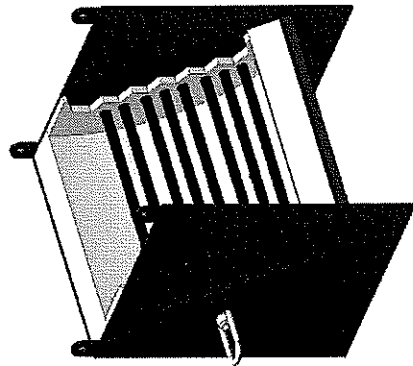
RENDER OF THE MOLD SHOWING THE INSTALLATION OF THE HEATER RODS, IF APPROPRIATE FOR THE PARTICULAR PSR BLOCK.
